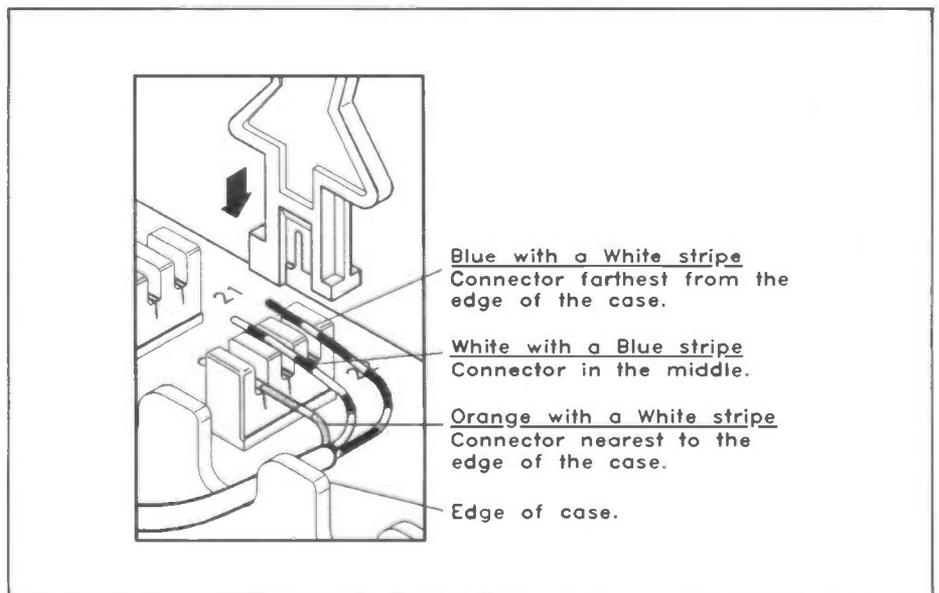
Connecting extension cabling to the FS1515 using an IDC tool.
